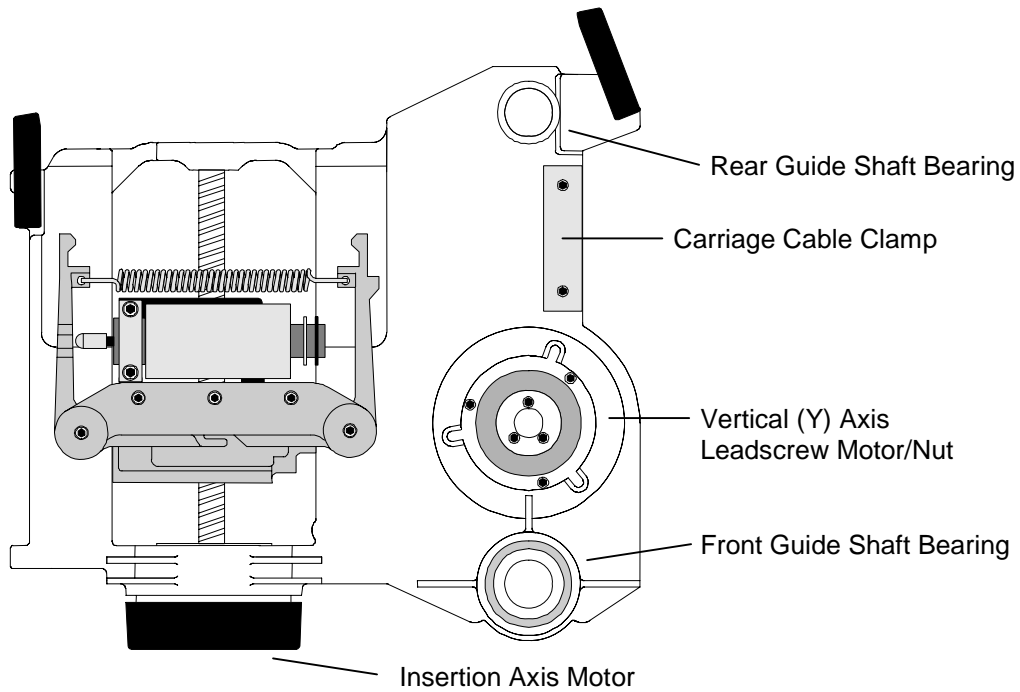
The TLS-412180/360 Carriage Assembly (P/N 500650-01-5)
